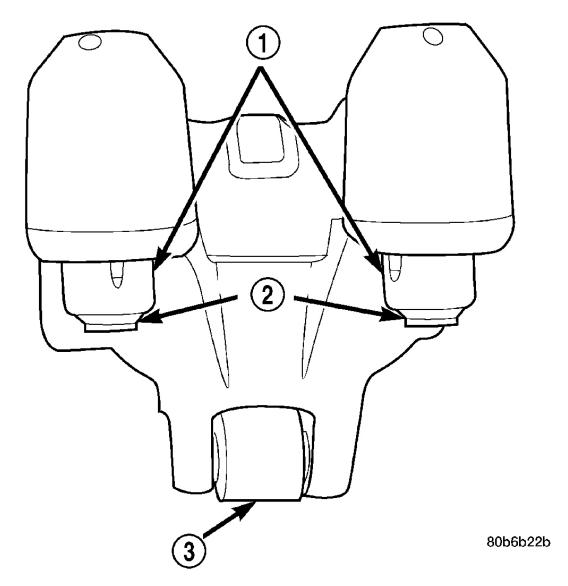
Rocker Arm Assembly Courtesy of CHRYSLER LLC
